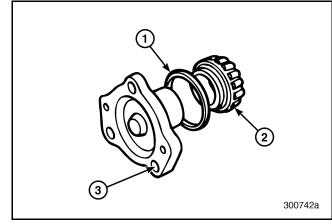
Exploded View of Front Countershaft Front Bearing Cover
